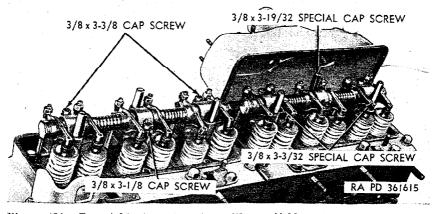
Top right view of engine with manifolds and rocker arm covers removed.
